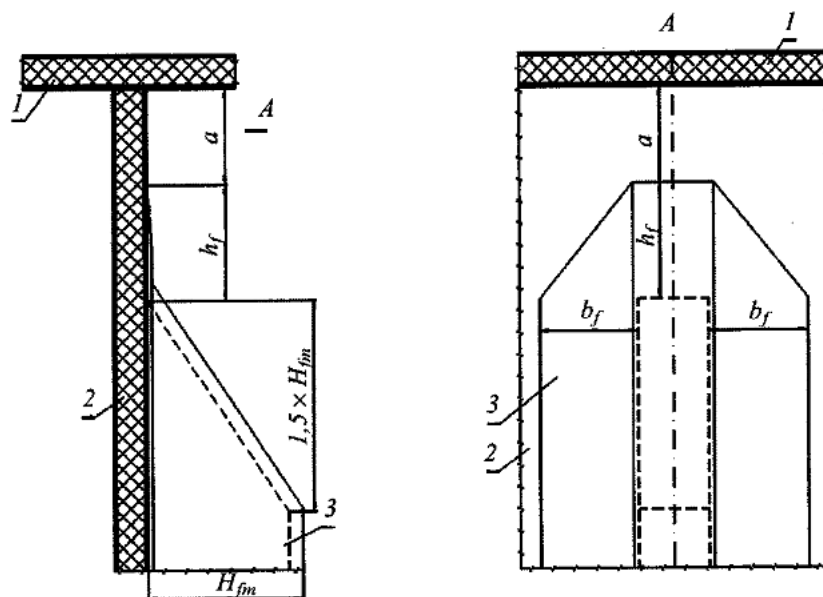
Beveled termination of the bulkhead stiffener:
